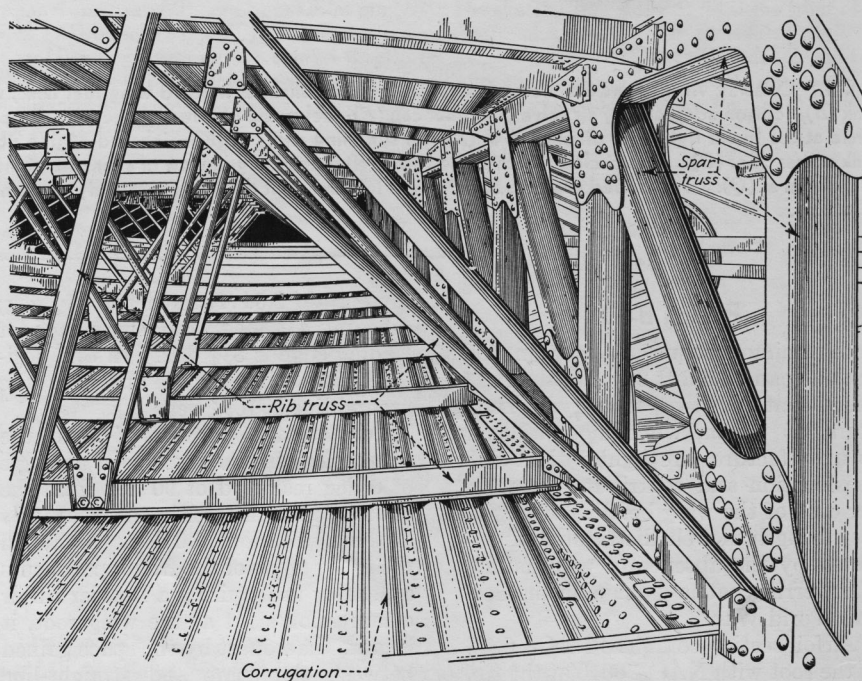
Close-up of the internal wing structure showing attachment details of spar truss, rib truss, and corrugations.
